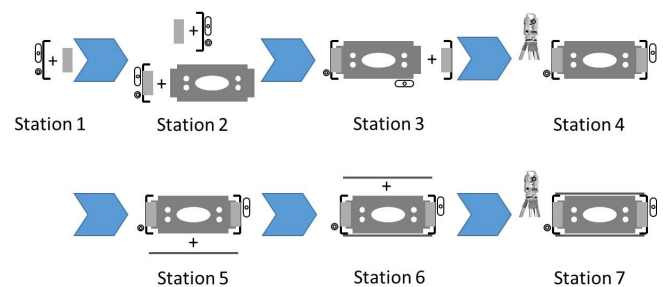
Assembly sequence of the wing-box cross-section using assembly strategy 2.
